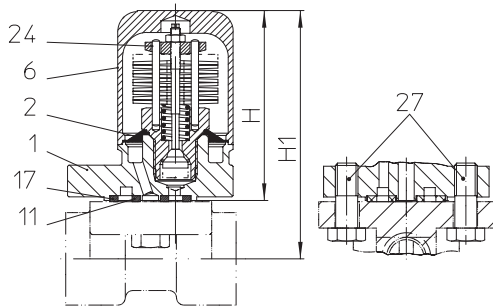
Universal flange with 2 x 3/8" UNC-thread
